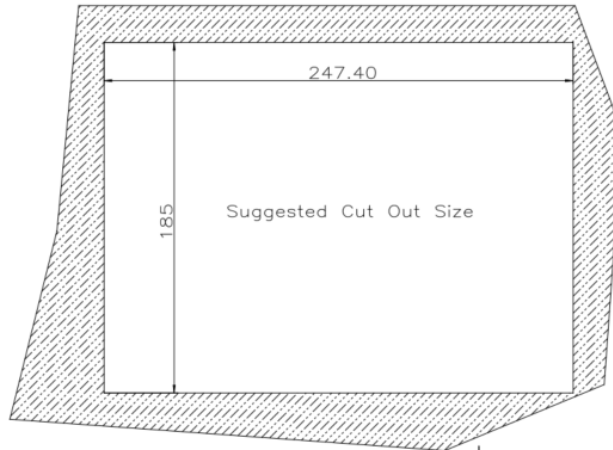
DM2-104E(L) Cutout Dimensions (Unit: mm)
